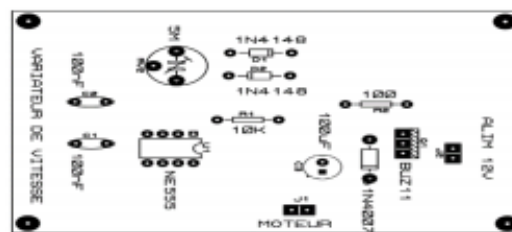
Disposing of DC DC conveter's components on printed circuit card
